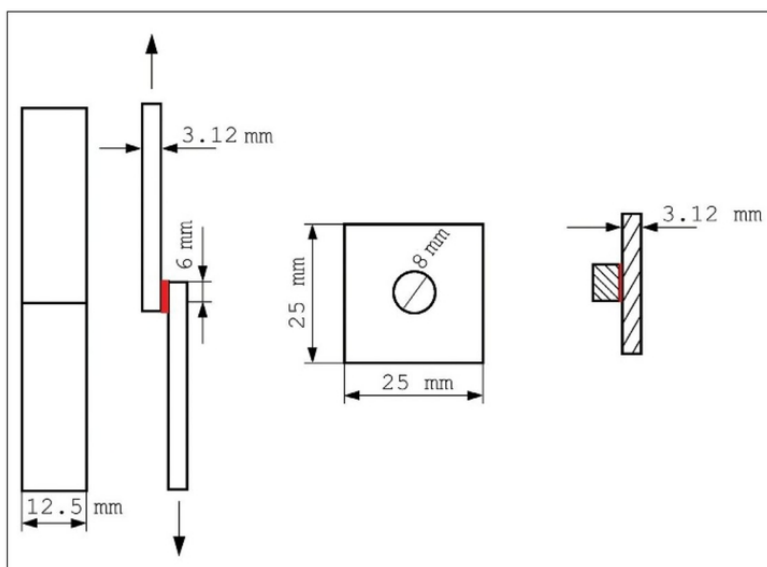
Specimens used for measuring shear strength of brazed joints: design (Ref. 9) for the compression test. Position of a brazed joint to be tested is colored in red.
